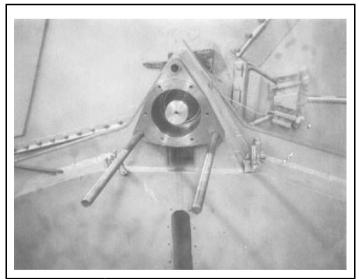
(MSSM0303AE) Two Bearing Housing Guide Rods in Position
